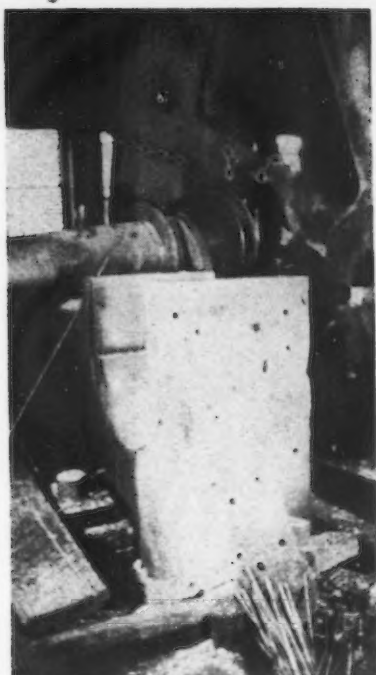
After brazing the engine pedestal appeared as shown here and savings by welding were reported to be about \$4200.
